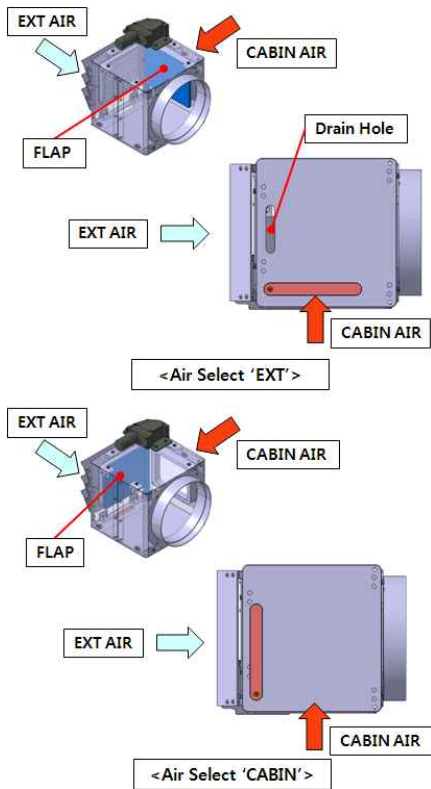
2nd modified Flapper Valve (Side & Bottom View)
